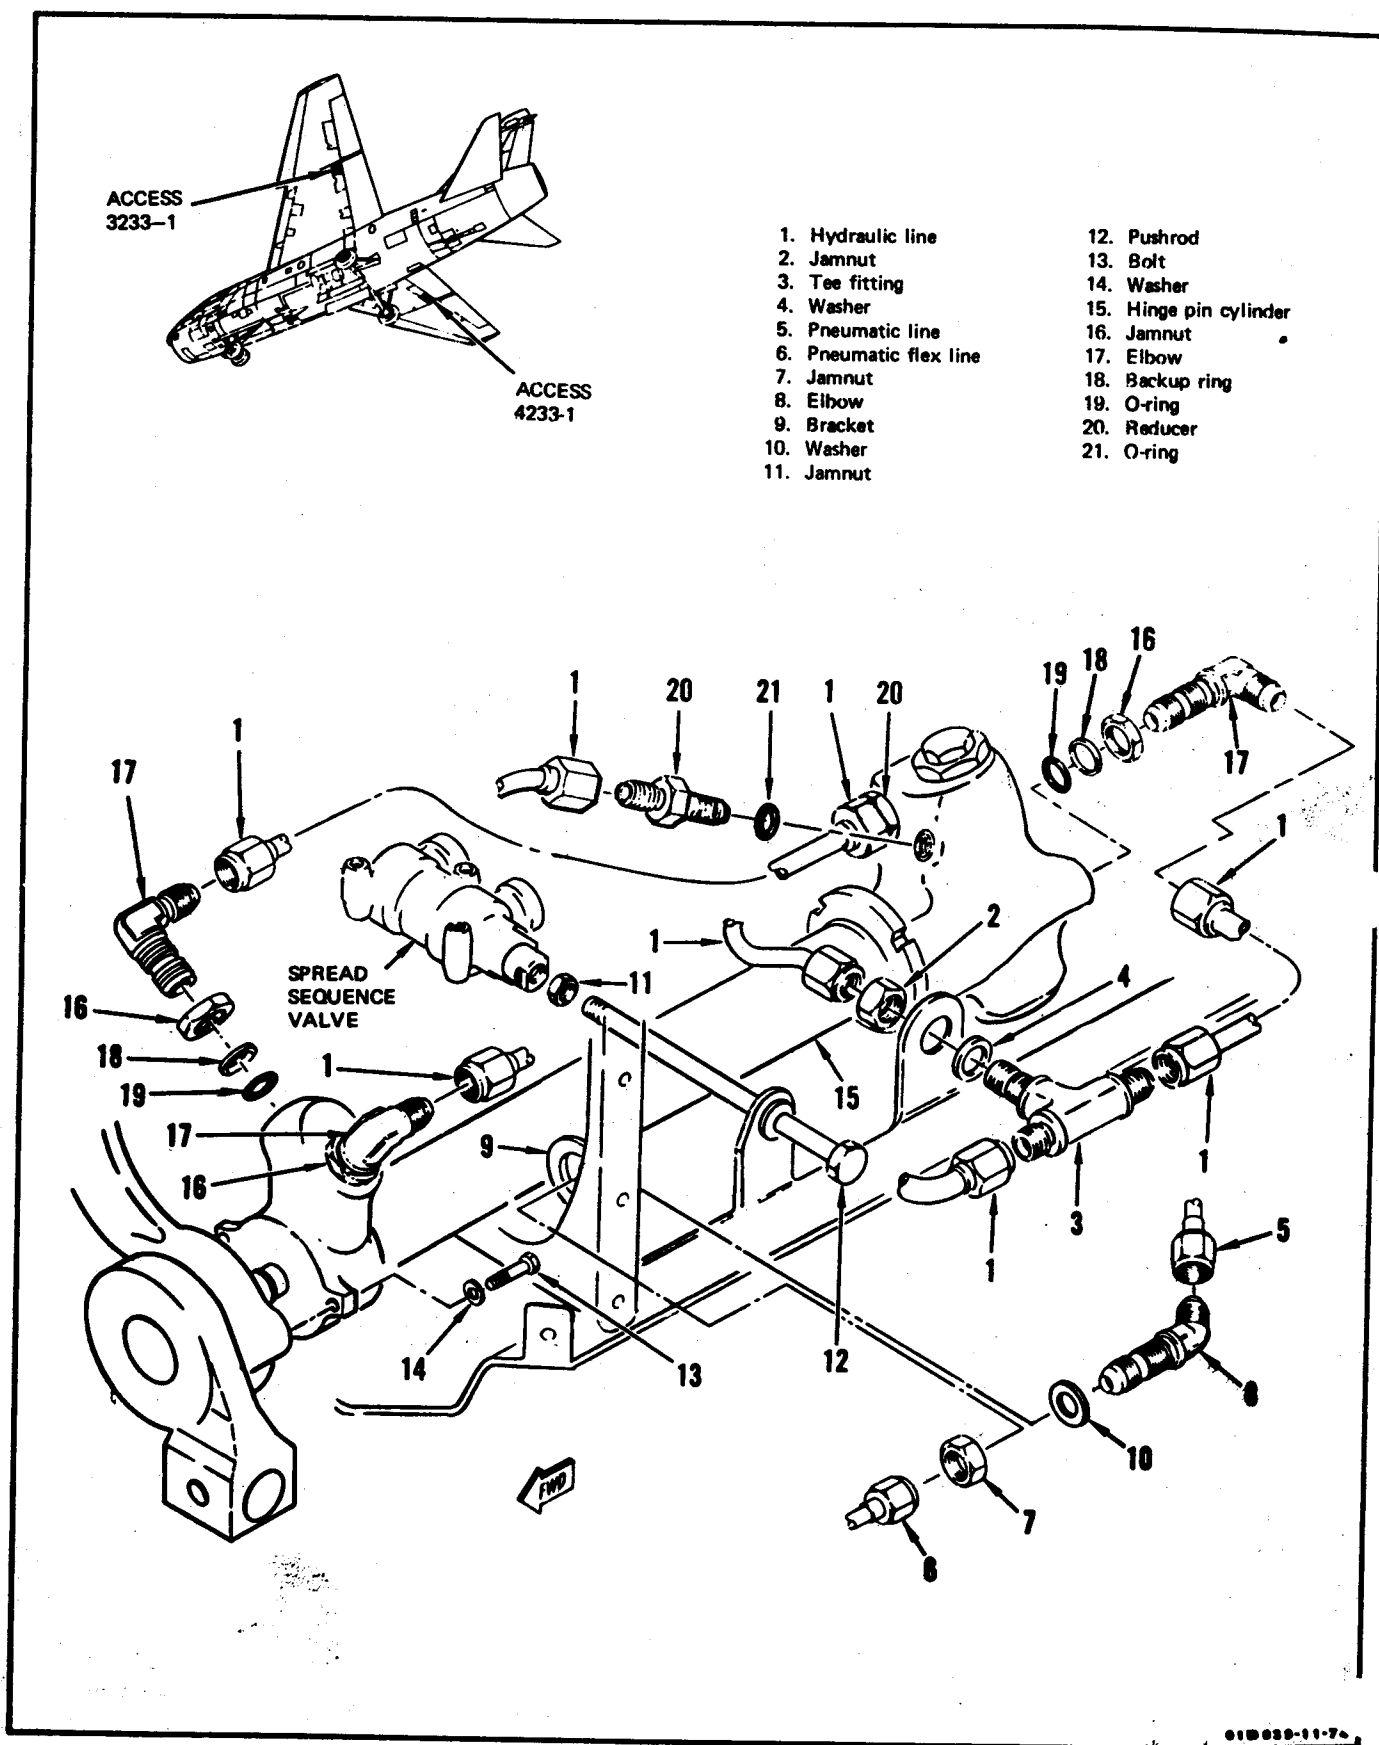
Aft Hinge Pin Cylinder Removal and Installation
